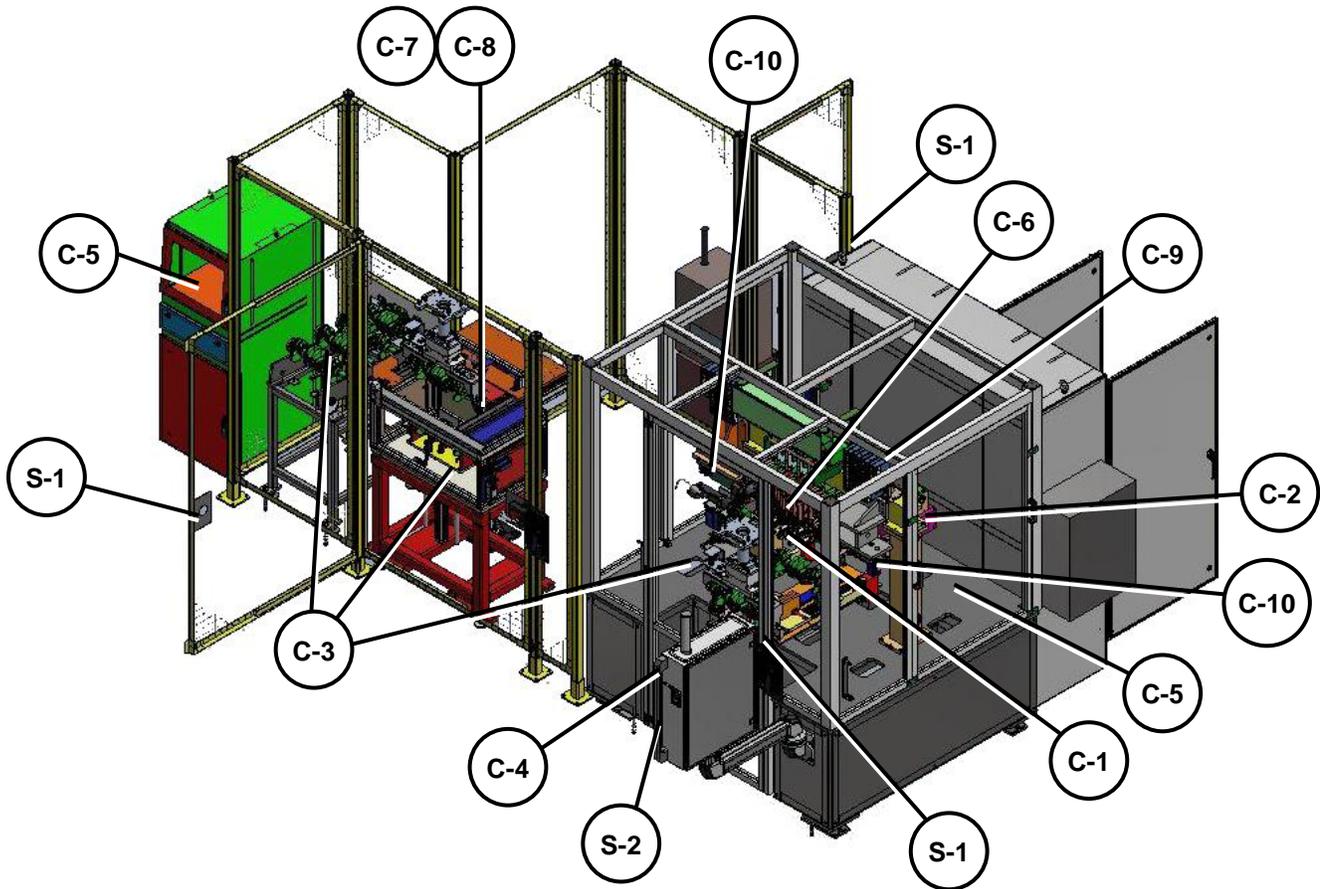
Crank Shaft Measuring Machine Station Layout
